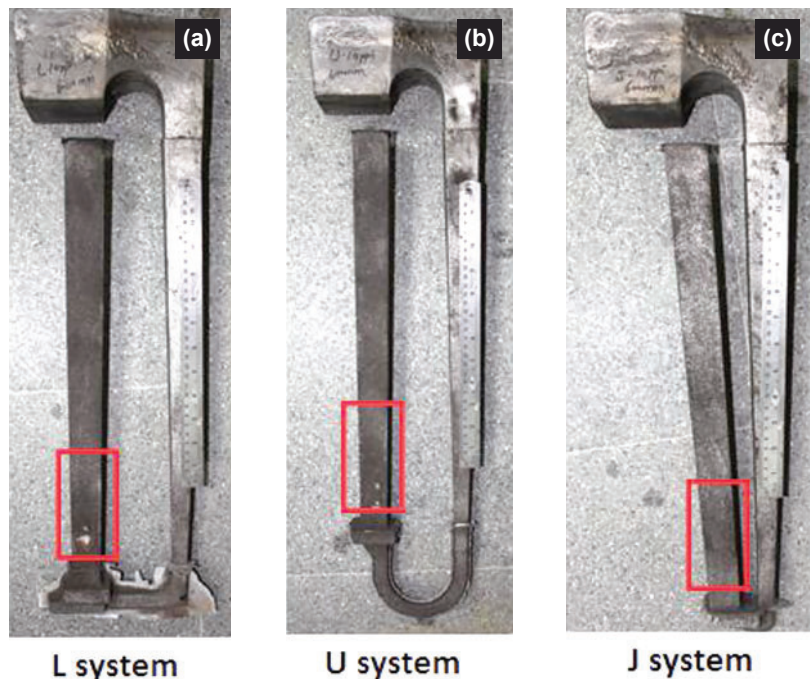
The specimens in the outlet region of the filter for remelt RPT test in (a) L system, (b) U system and (c) J system (indicated by the red square box).
